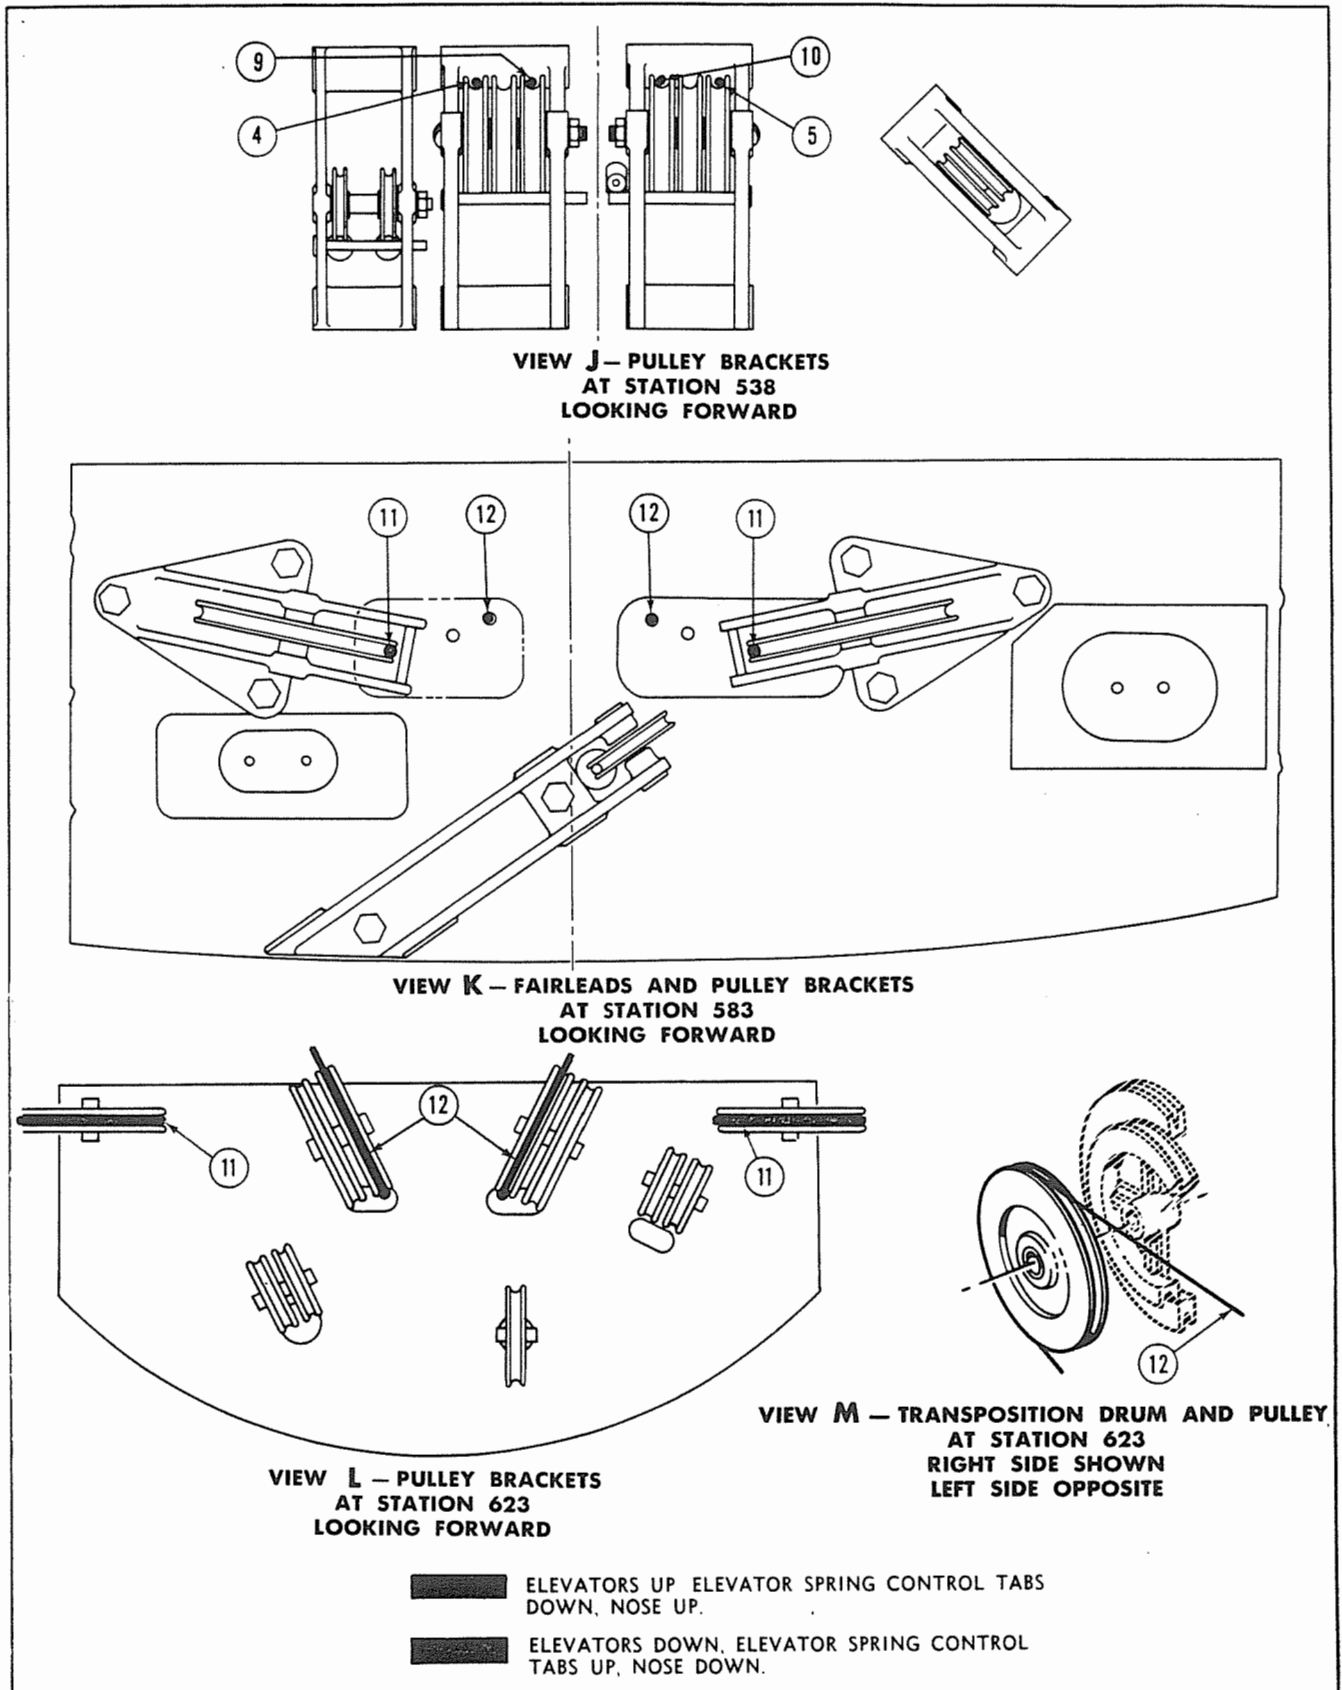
(Sheet 5 of 7 Sheets). Elevator and Elevator Spring Control Tab Control System — Pulley Brackets, Stations 538 and 623; Fairleads and Pulley Brackets, Station 583
